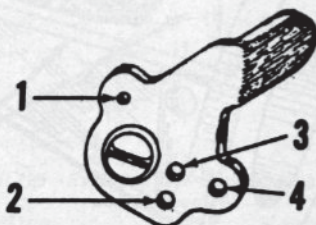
View showing throttle shaft arm typical of all carburetors. It is important that throttle opening or governor spring and/or link be hooked into proper hole. Refer also to Fig. HL211.
